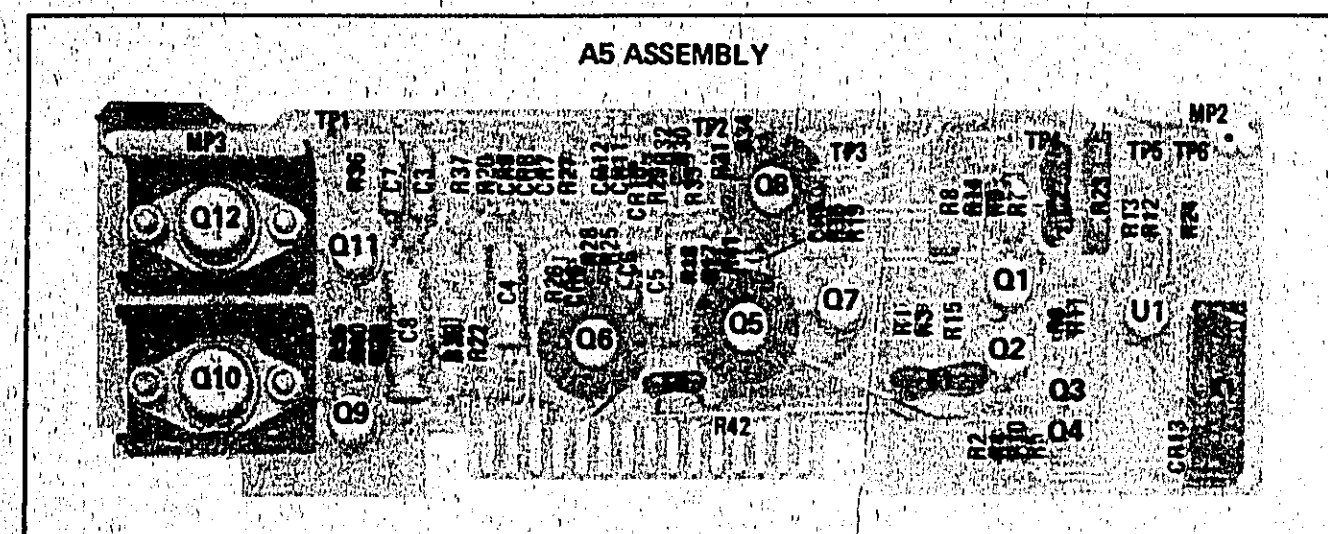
A5 FM Amplifier Assembly Component Locations
